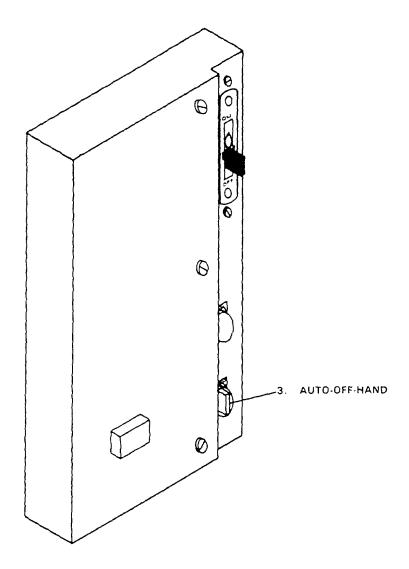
Steering Hydraulic Pump Motor Controller.
